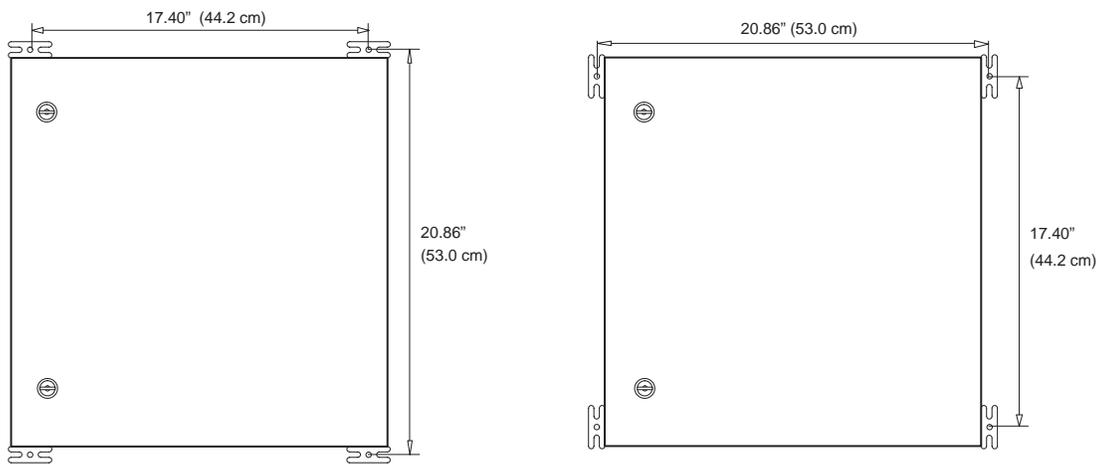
Large NEMA 4 Housing - Installation Dimensions
